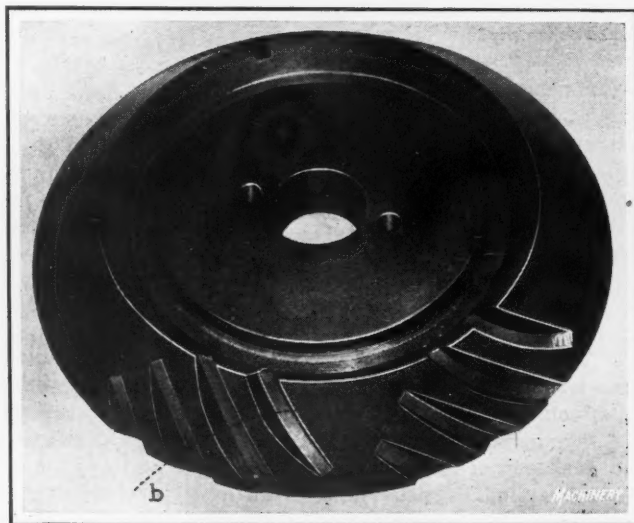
Gear Blank in which Crescent Shaped Cuts have been generated by using a Conical Type of Fly Tool
